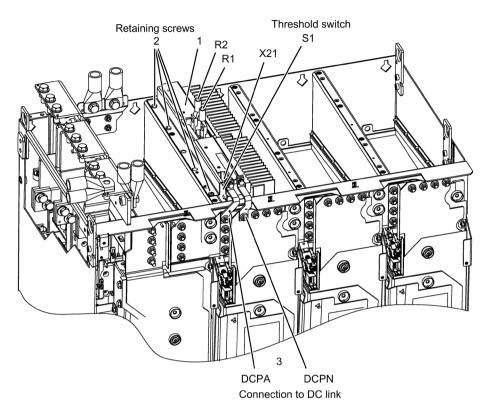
Installing the Braking Module in a Smart Line Module / Active Line Module / Motor Module, frame size JX
